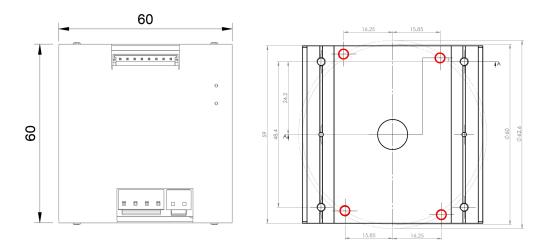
TMCM-1278 top view mechanical dimensions (left) and position of mounting holes (marked red / right).
